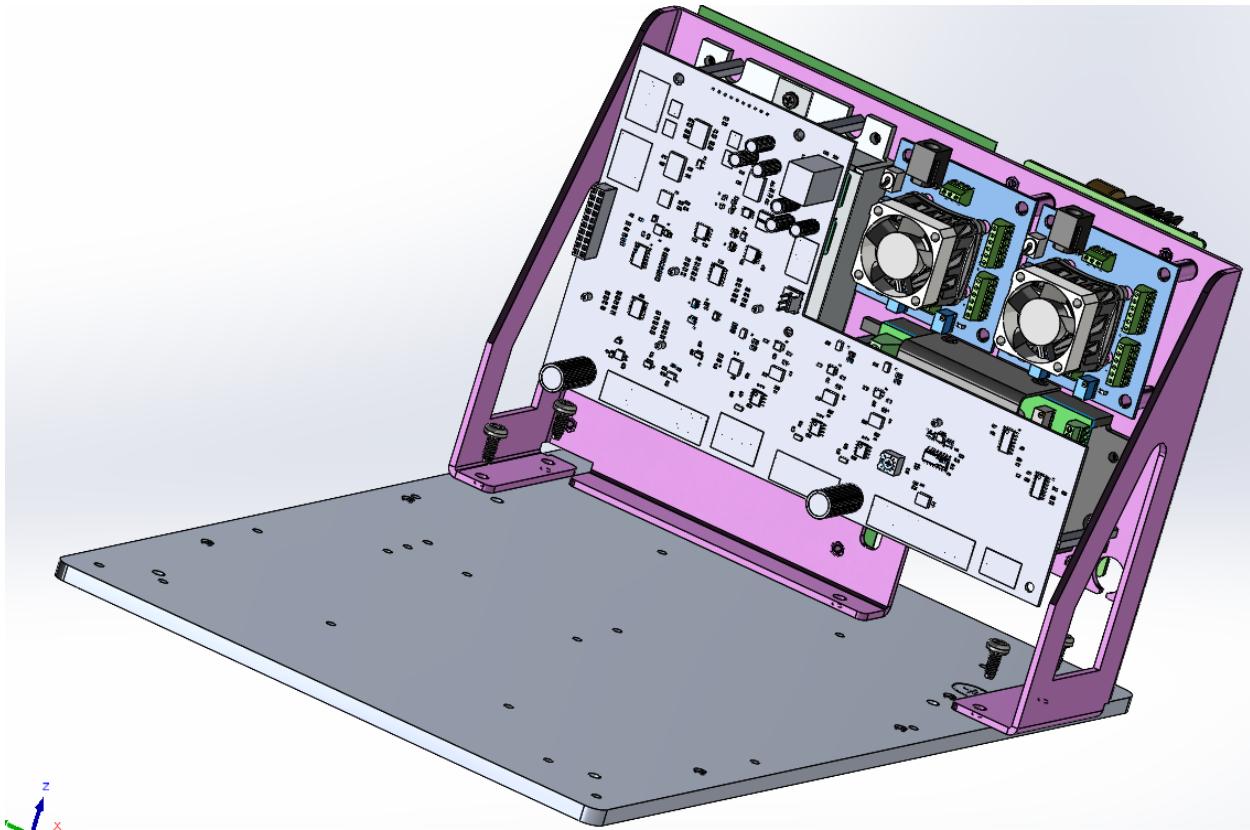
Mounting Electrical Bracket subassembly to the Base Plate
